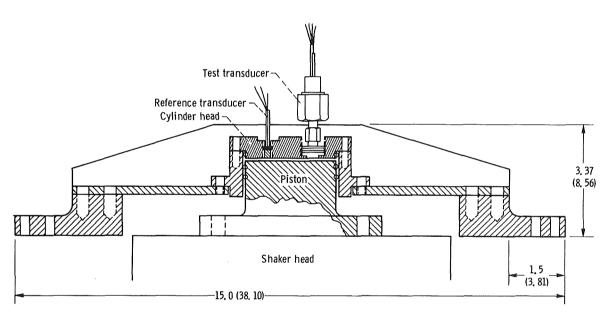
Piston-in-cylinder calibrator. Dimensions are in inches (cm).
